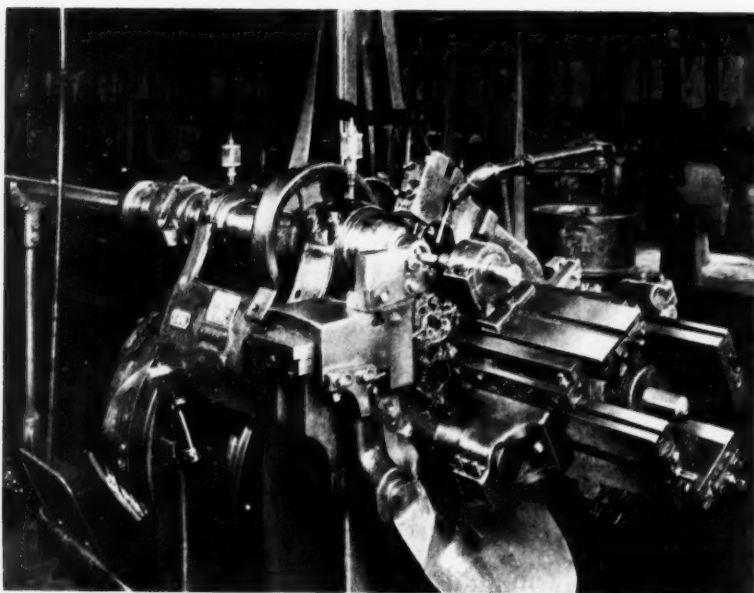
Single-spindle Automatic before its Conversion for Use in Machining Large Taper Roller Bearing Races
